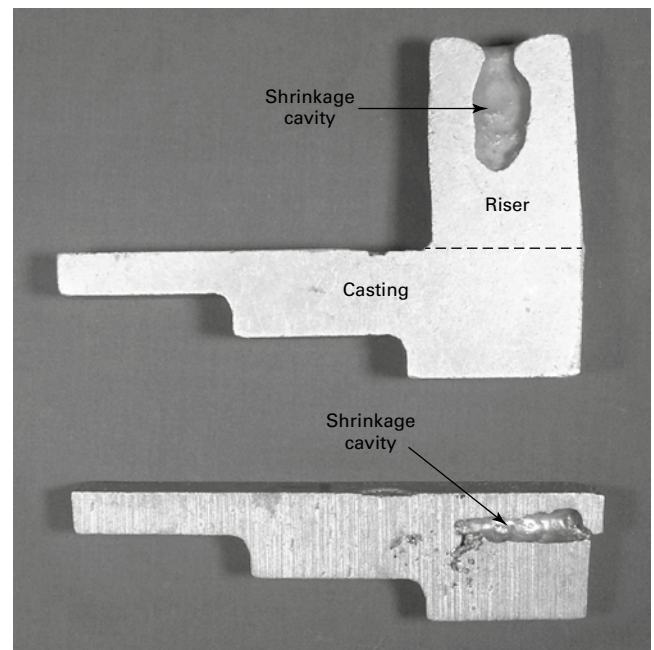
A three-tier step-block aluminum casting made with (top) and without (bottom) a riser. Note how the riser has moved the shrinkage void external to the desired casting. (Courtesy Ronald Kohser.)
